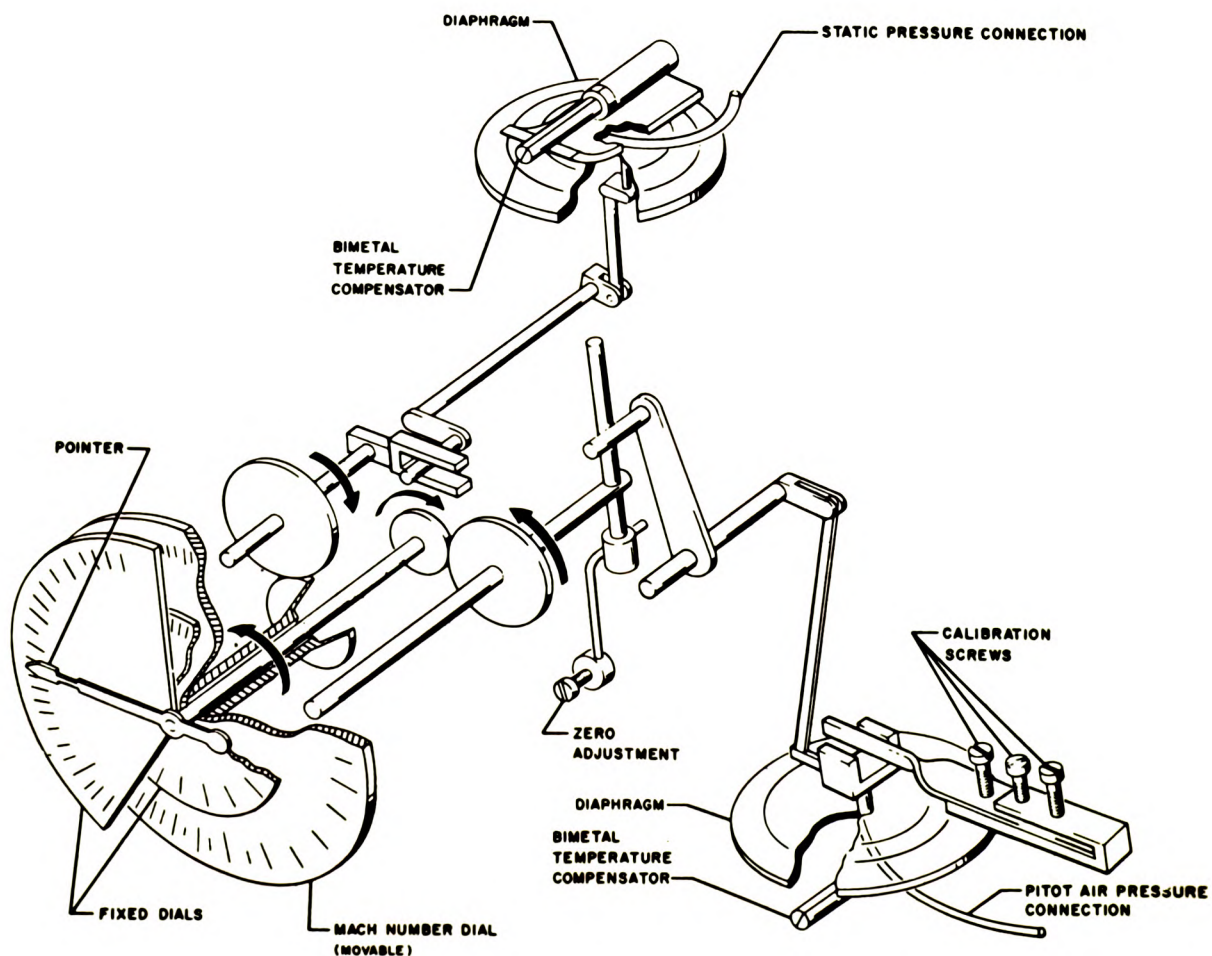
Airspeed and Mach number indicator mechanical schematic.
